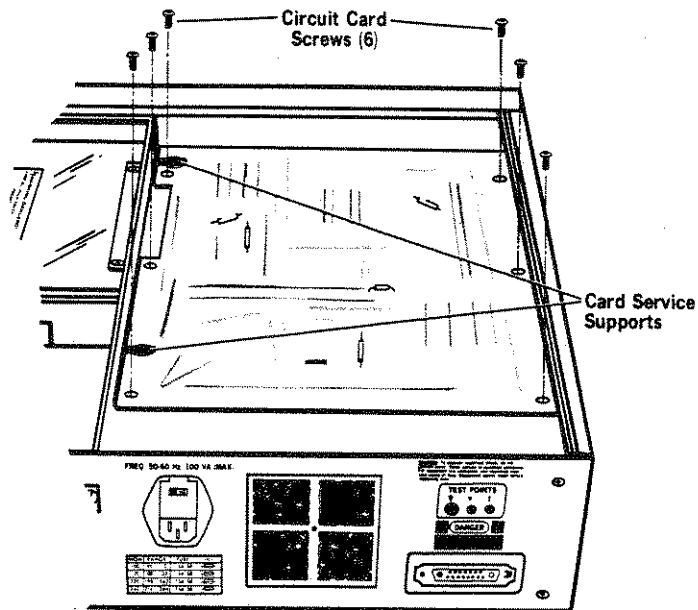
Removing the Low Voltage Circuit Assembly Screws
